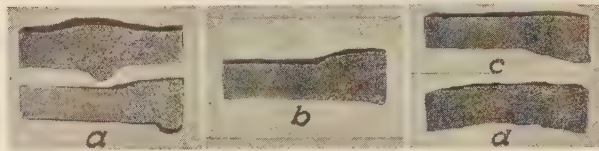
CROSS-SECTIONS OF 6-IN. STANDARD-PIPE OXYACETYLENE BUTT WELD
